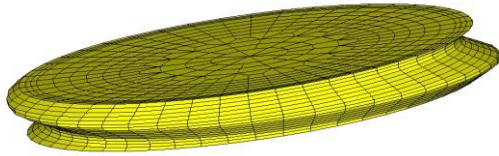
Profile of the cross section of external thread perpendicular to the bolt axis
